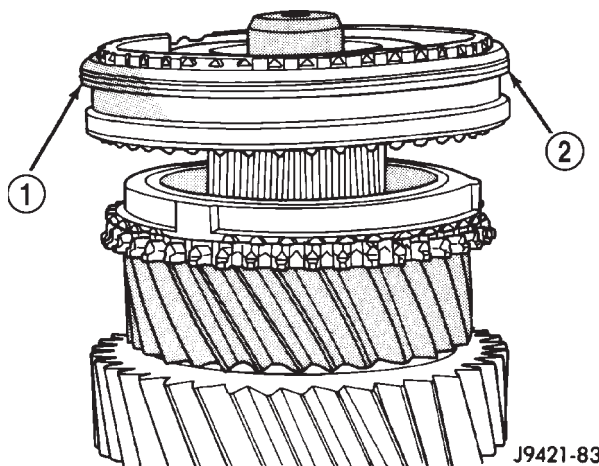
3-4 SYNCHRO HUB ON OUTPUT SHAFT
